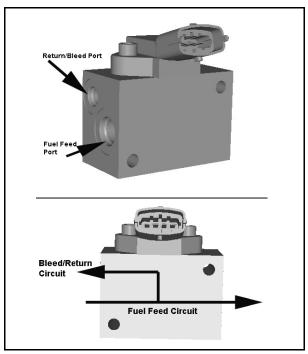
Gasoline Fuel Pressure and Temperature Manifold Assembly
